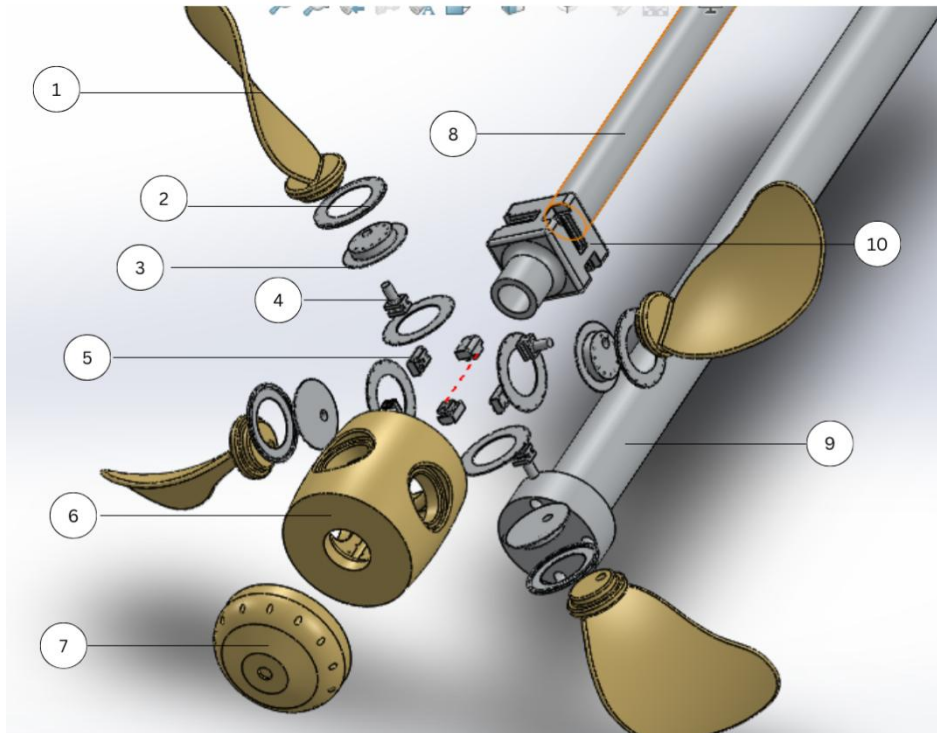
Exploded view of a Controllable Pitch propeller.
